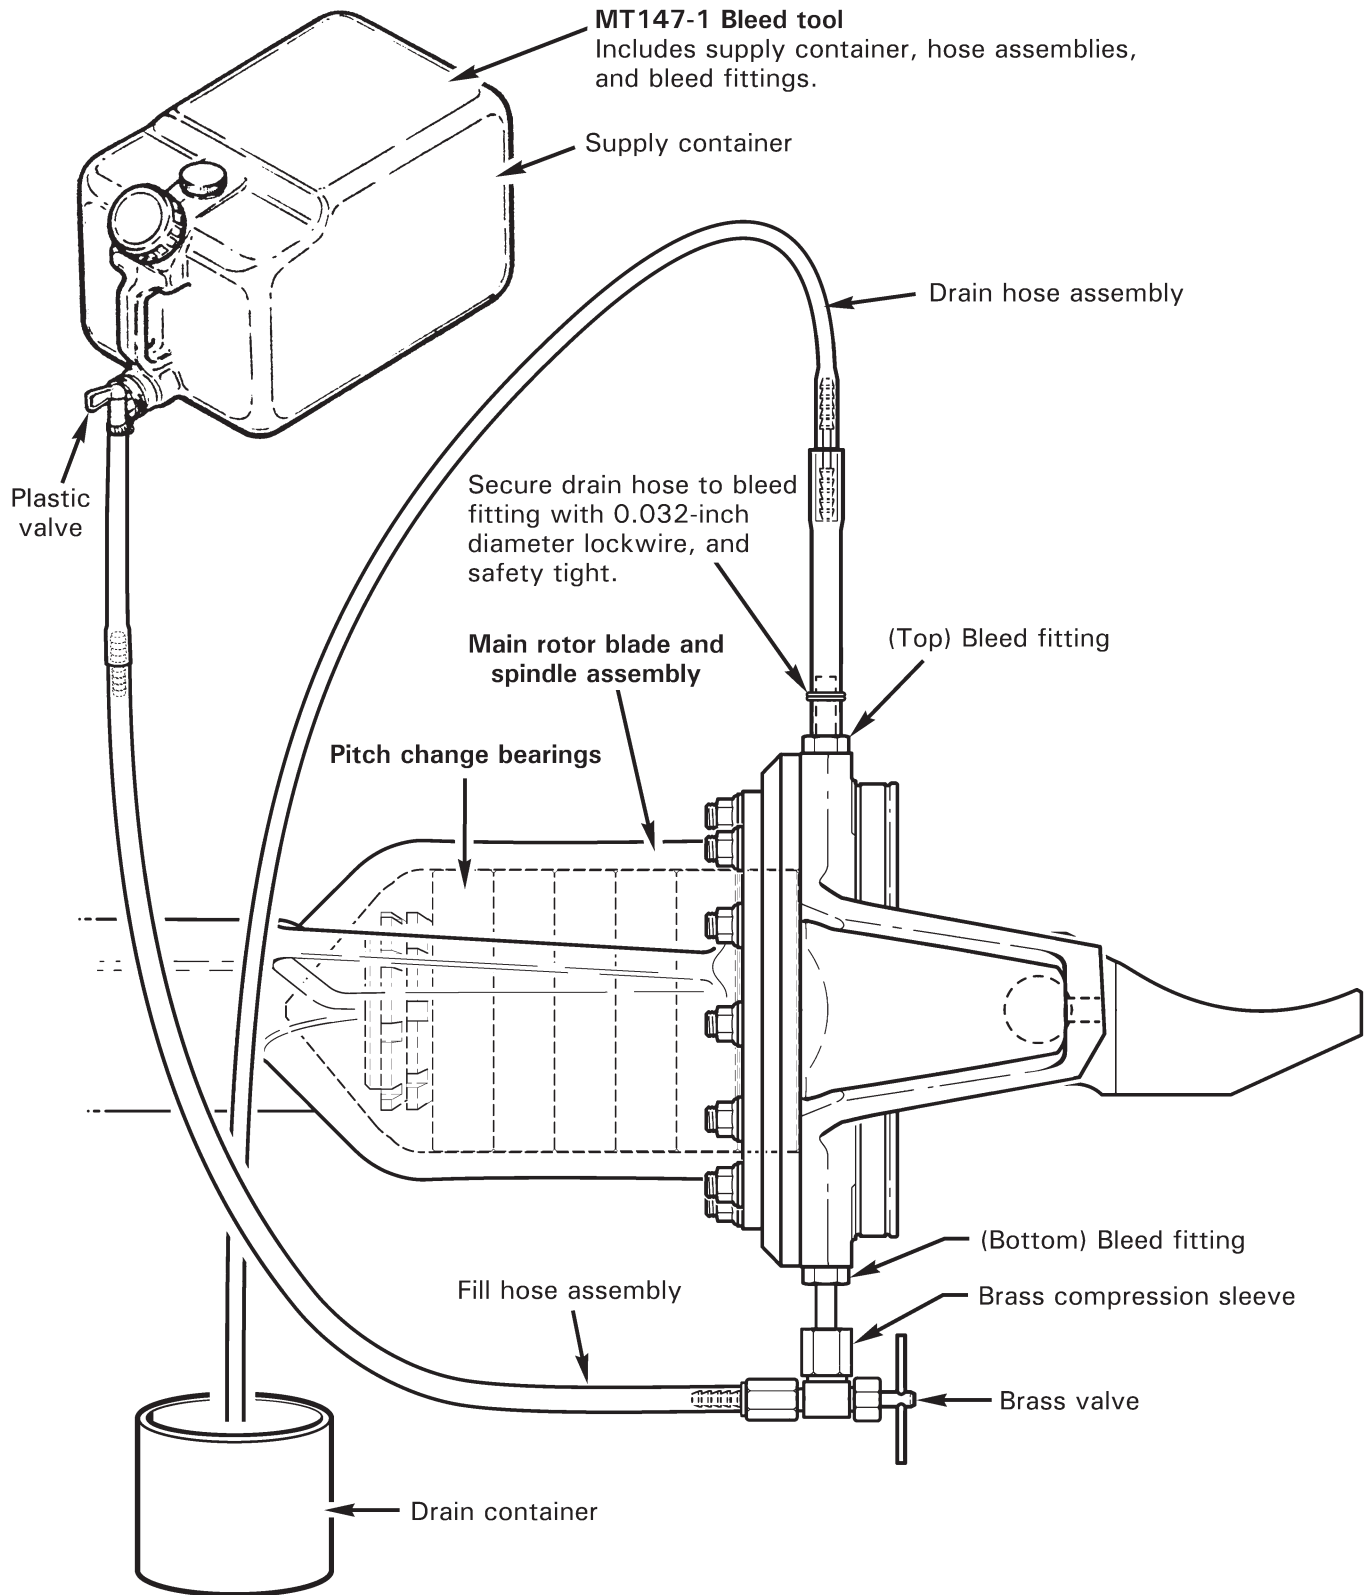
MAIN ROTOR BLADE PITCH BEARING HOUSING
